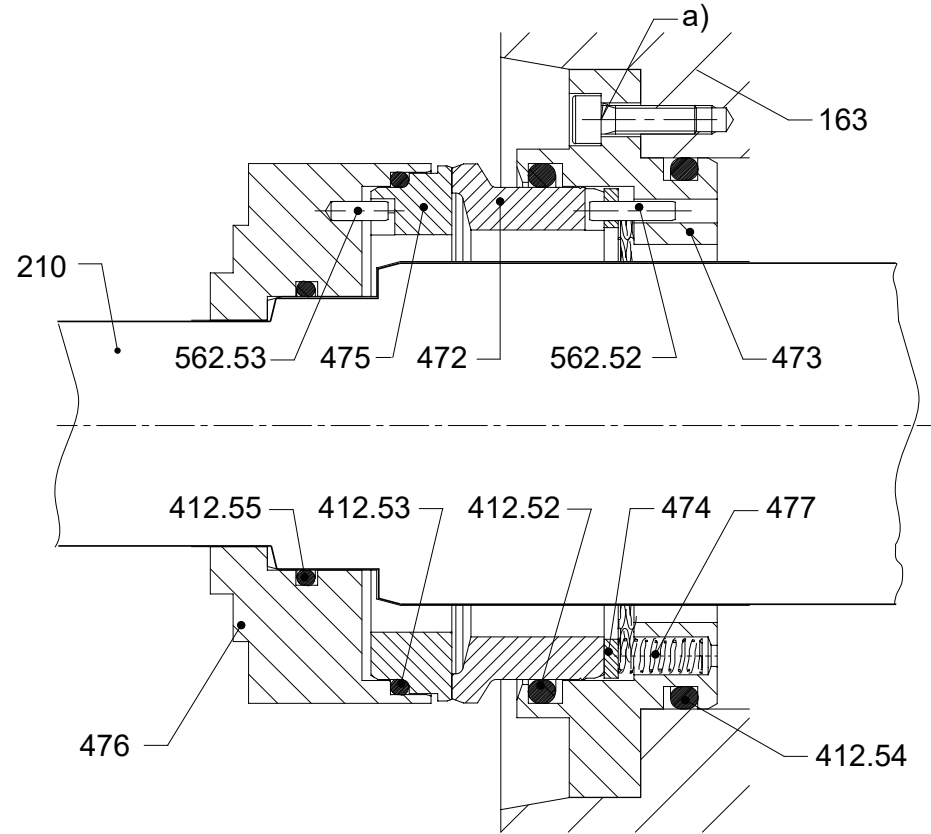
4STC, version with clamped mating ring carrier and secured primary ring carrier
